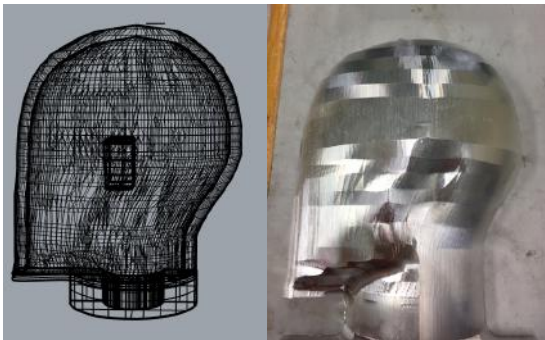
Head form left half, CAD drawing on the left and manufactured model on the right.
